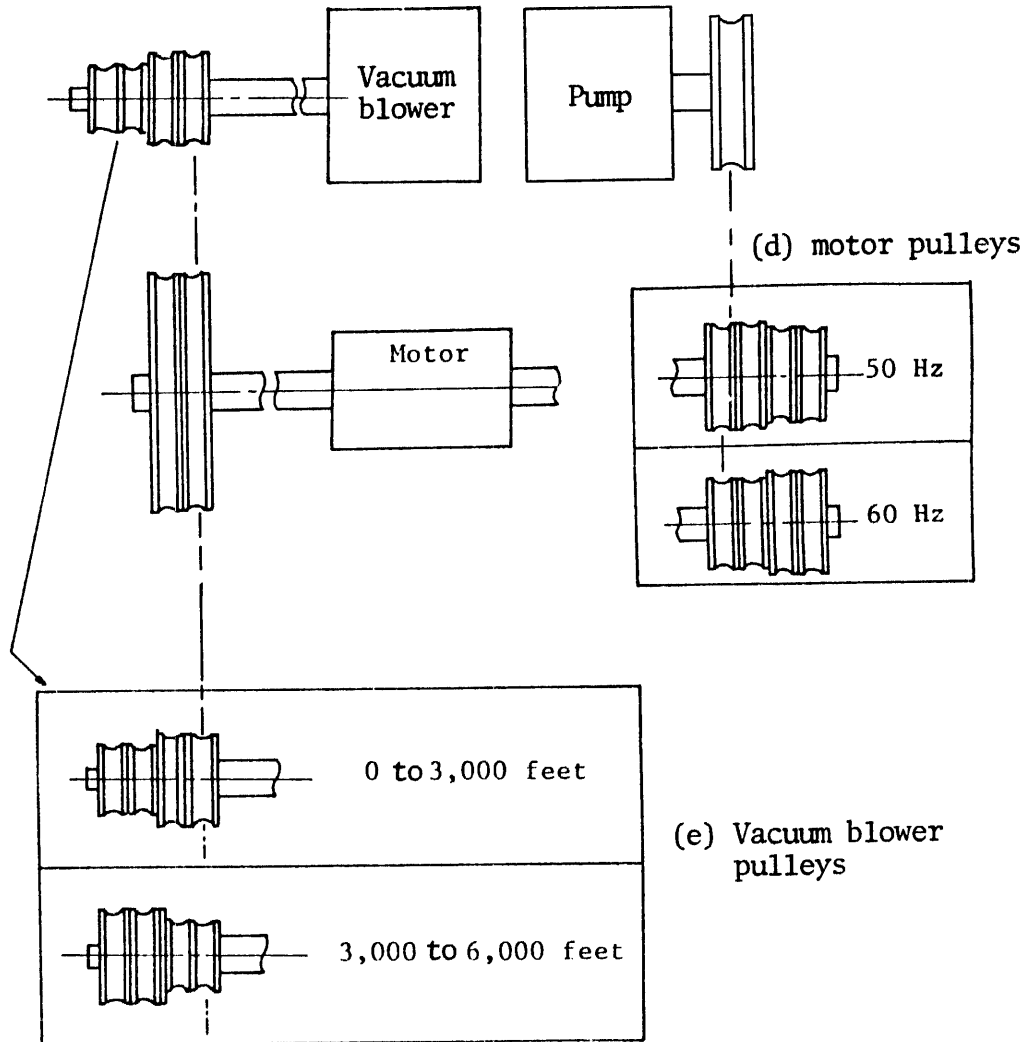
Air supply unit: vacuum blower and motor pulleys
